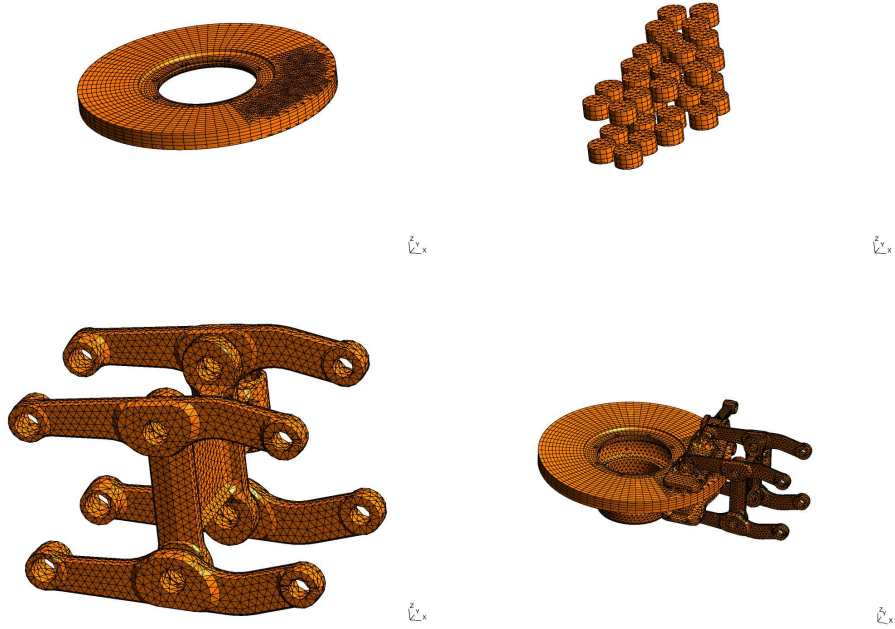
braking system with disc (upper left), pads (upper right), caliper (bottom left) and full brake (bottom right)
